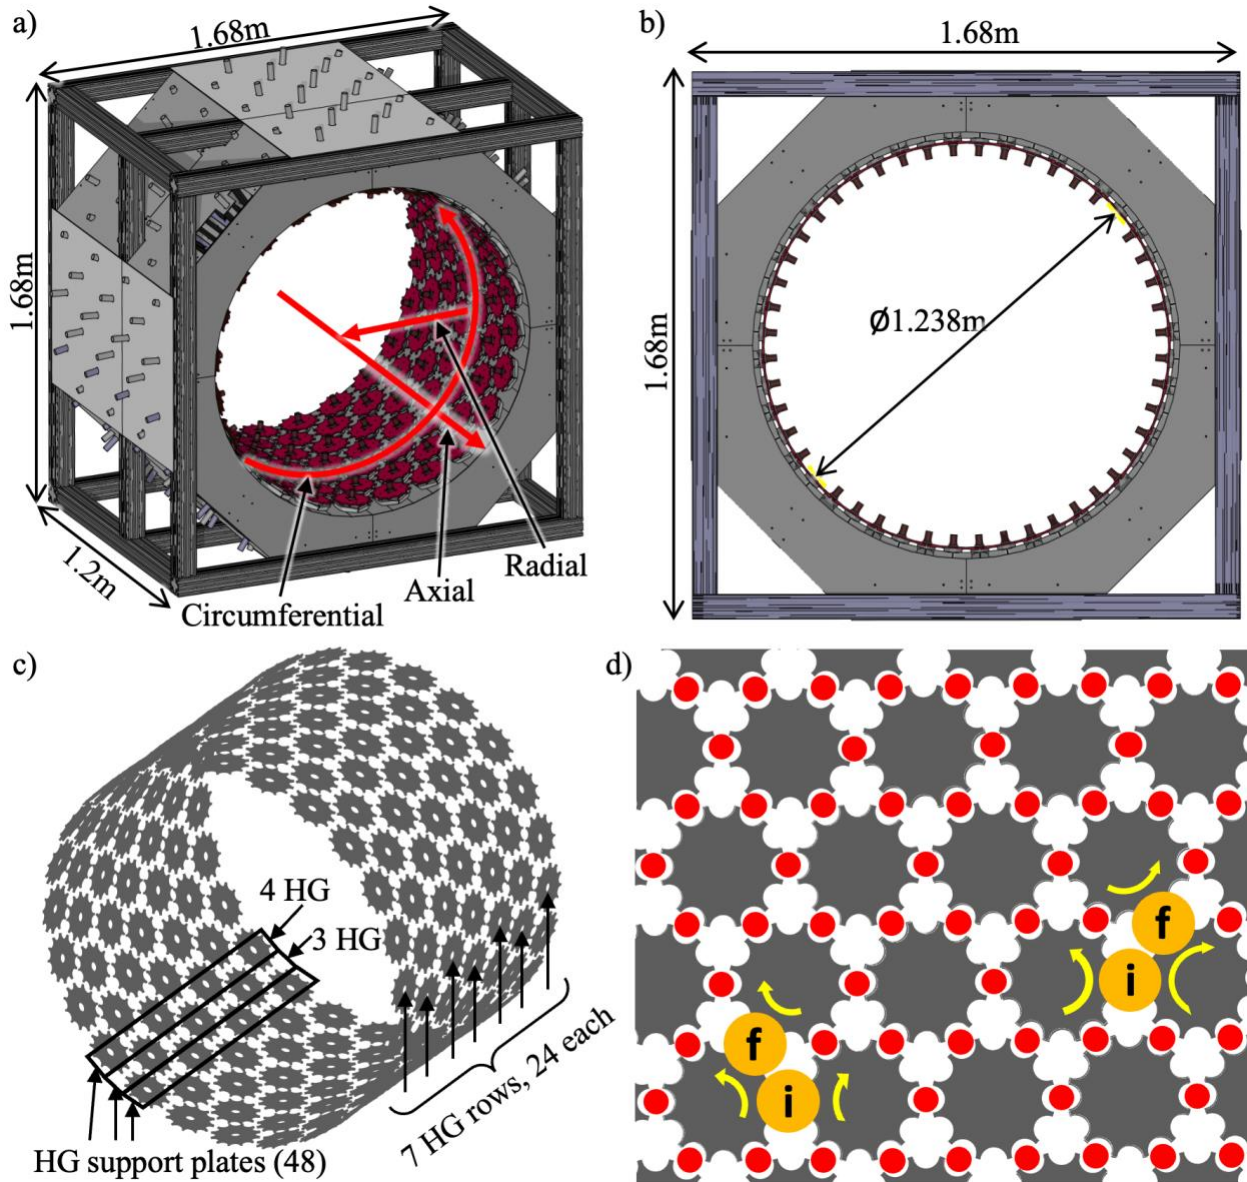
Chain & Sprocket radial braider overview. a) Overall dimensions and principal braider axes. b) Front view showing the 48 HG planes around the braider and braider diameter. c) 168 HGs arranged in a hexagonal packing on the circumferential-axial plane. There are seven rows of 24 HGs. The HGs are rotating around shafts connected to 48 HG support plates with three of four shafts each. d) View of the HG hexagonal packing on the circumferential-axial plane. The red dots are rest positions between two HGs, AKA nodes. There are two carrier movements from initial (i) to final (f) nodes with HG rotation directions.
